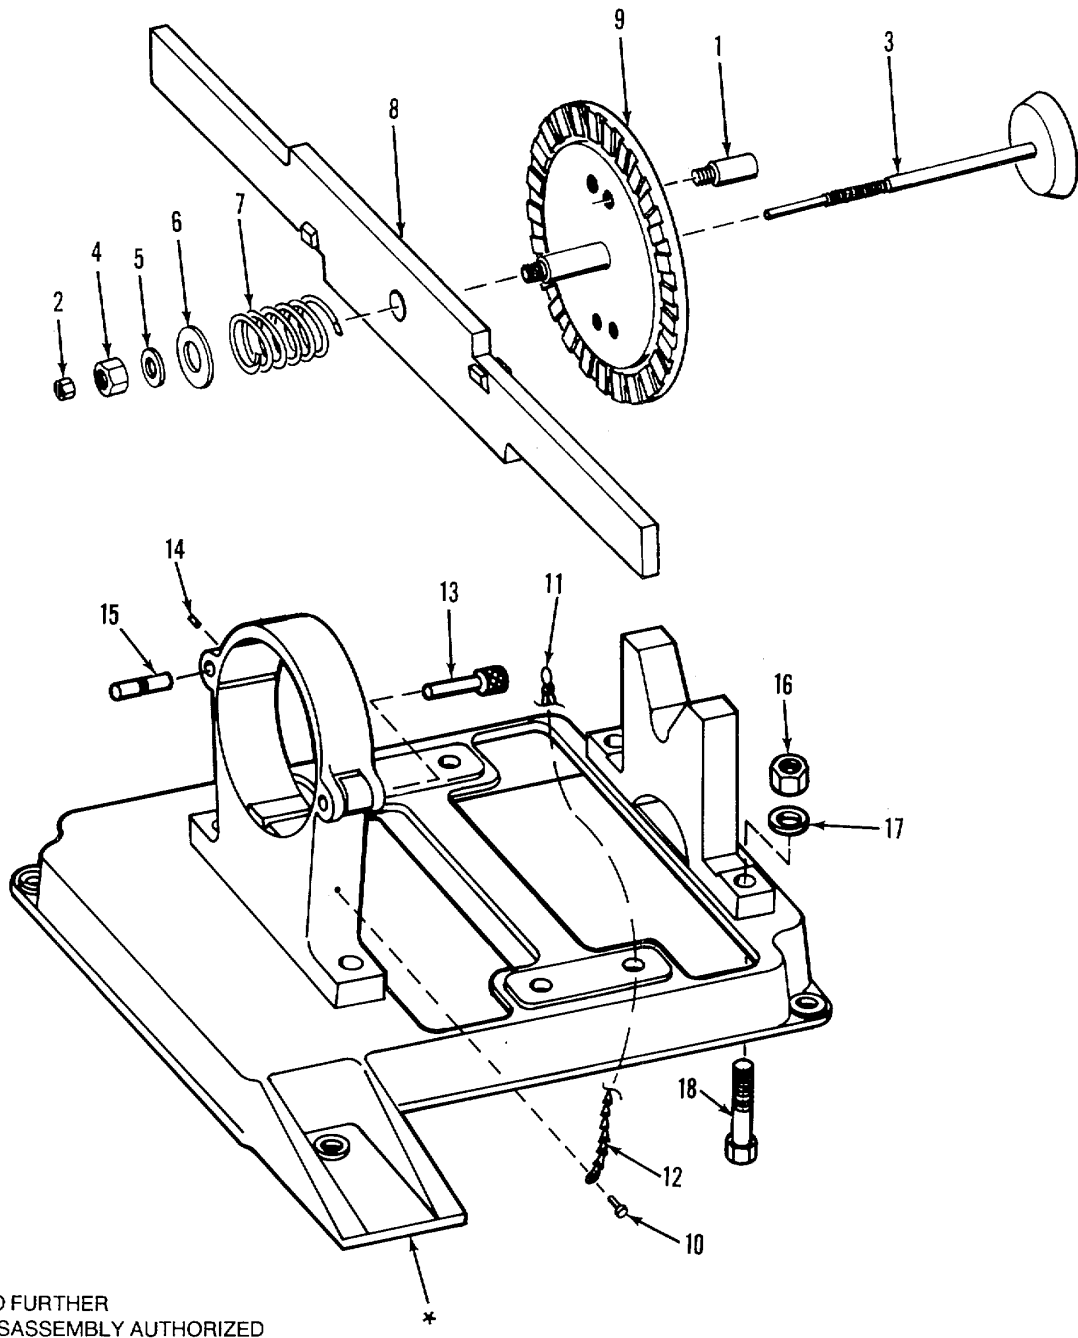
Gun, subcaliber caliber .30: M9 and door assembly.
